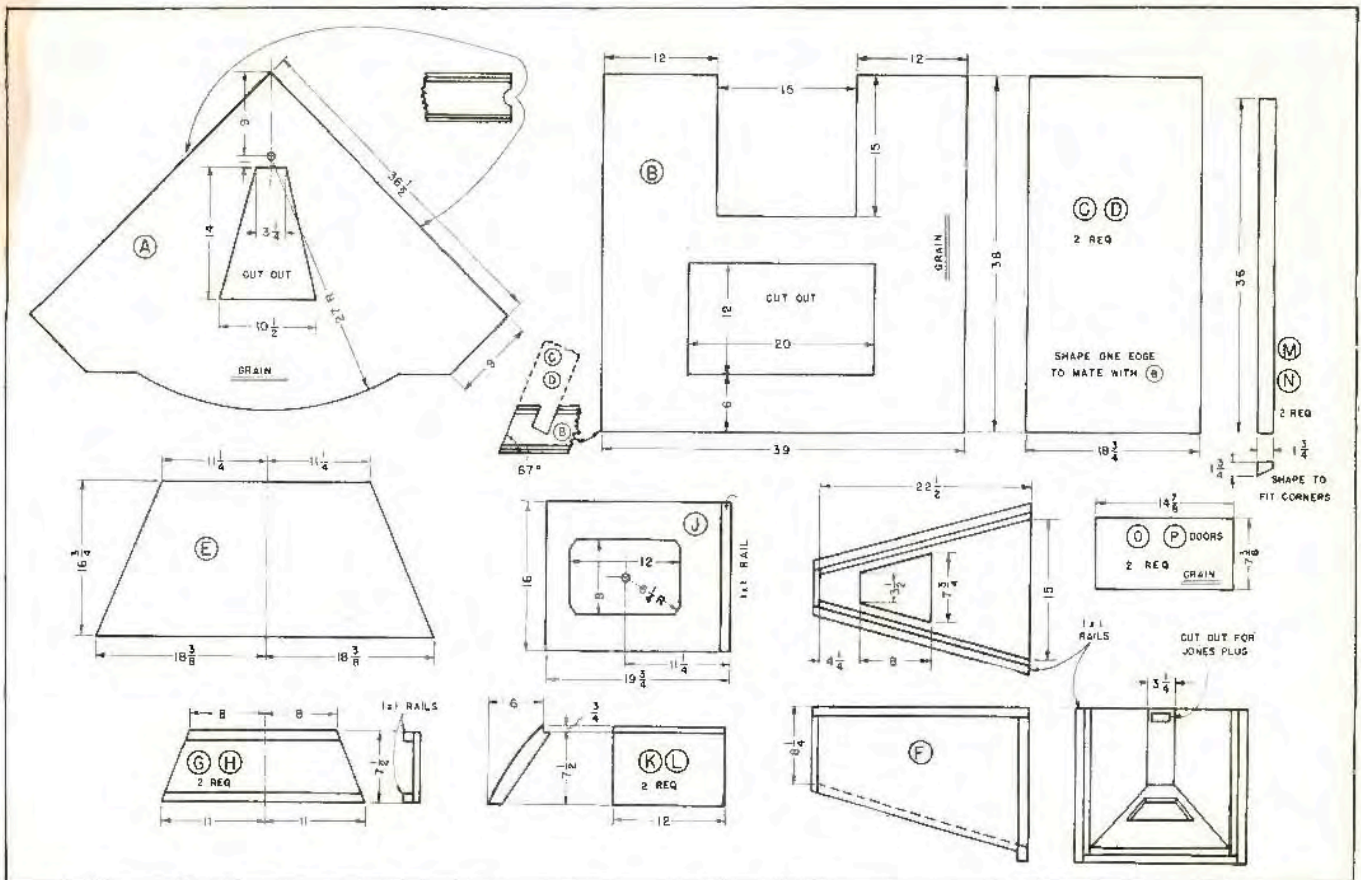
Details of the pieces which comprise the lower cabinet, speaker well, and tube enclosure.
